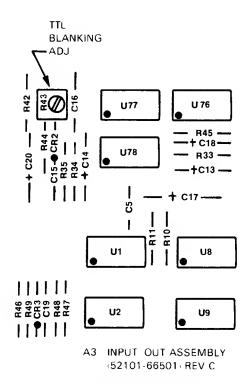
Blanking Delay Adjustment Location on Input/Output Board
